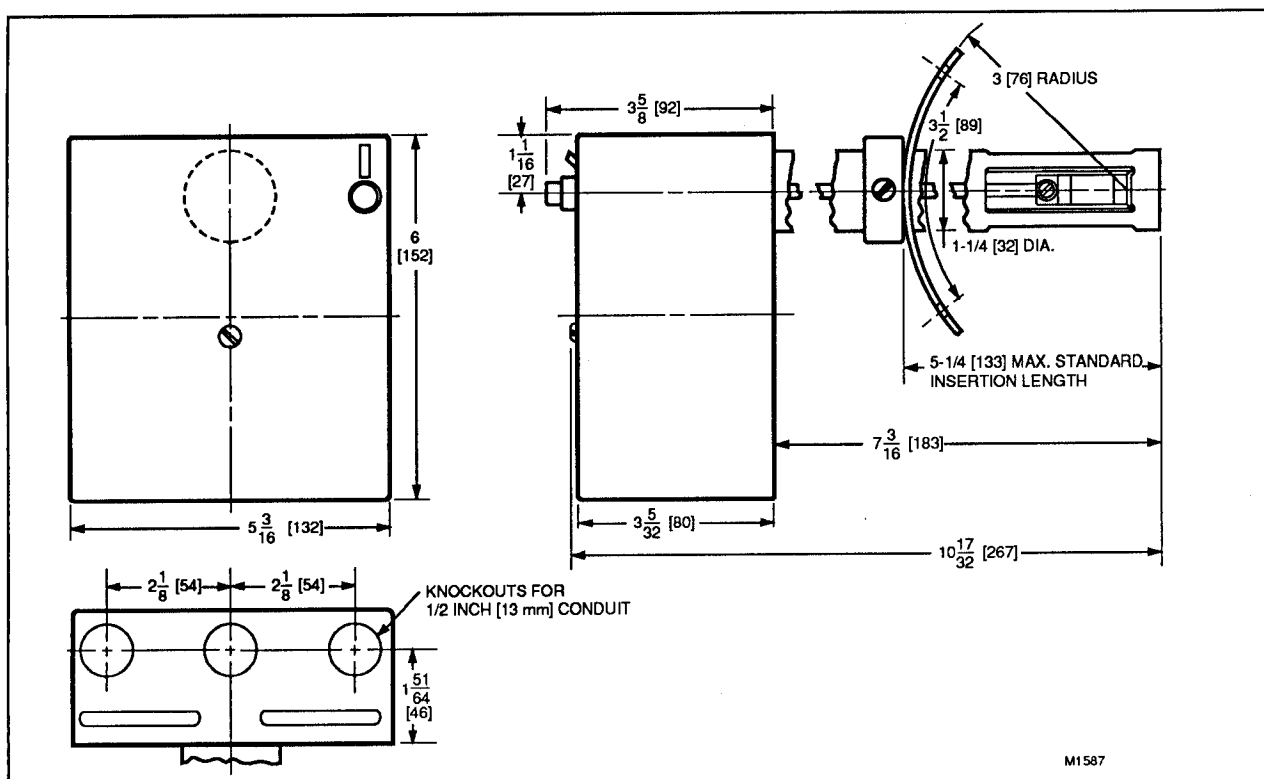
INSTALLATION DIMENSIONS IN INCHES AND [MILLIMETERS].
